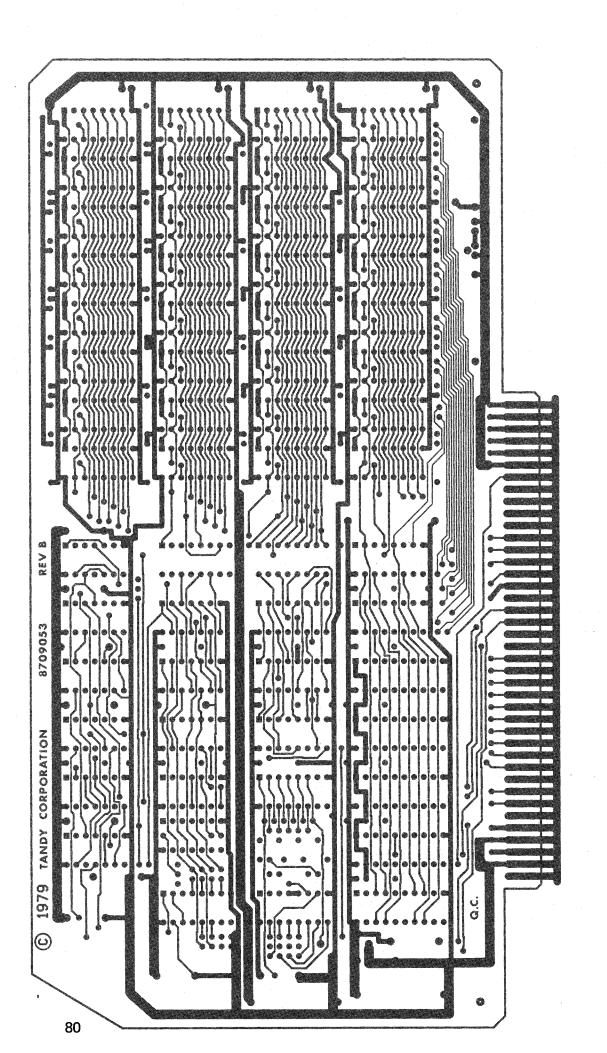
32K and 64K RAM Memory Board Printed Circuit Board — Circuit Side
